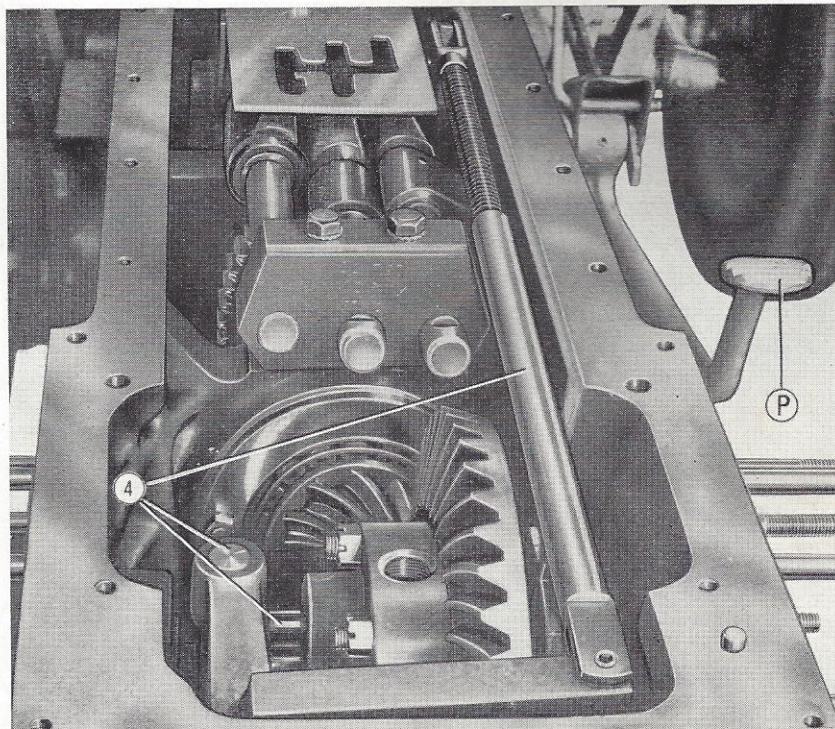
Top view of gearbox, gear-shift and differential lock.
